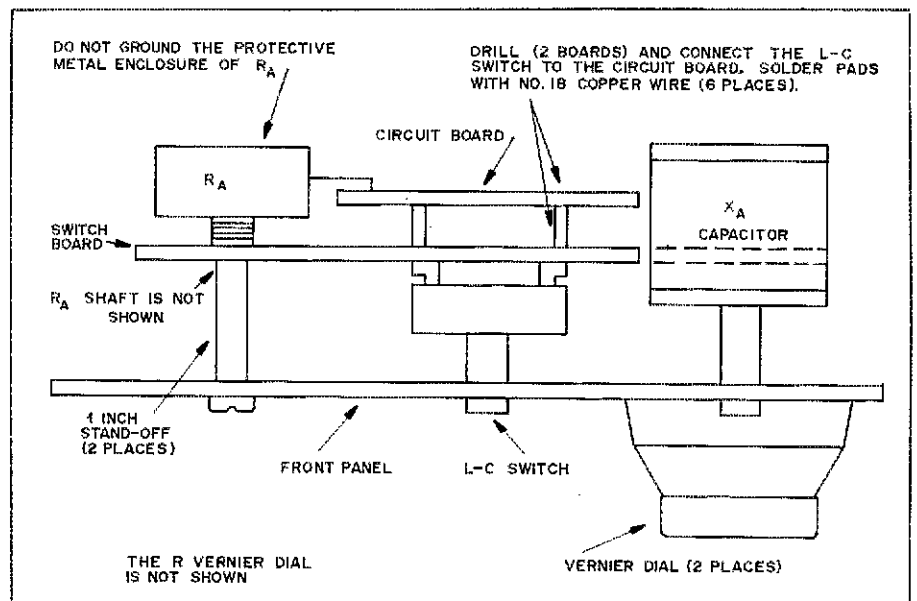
Bridge circuit assembly. See text for important information regarding the mounting of R_A . Further detail is shown in the switch board etching pattern printed in the "Hints and Kinks" section.
